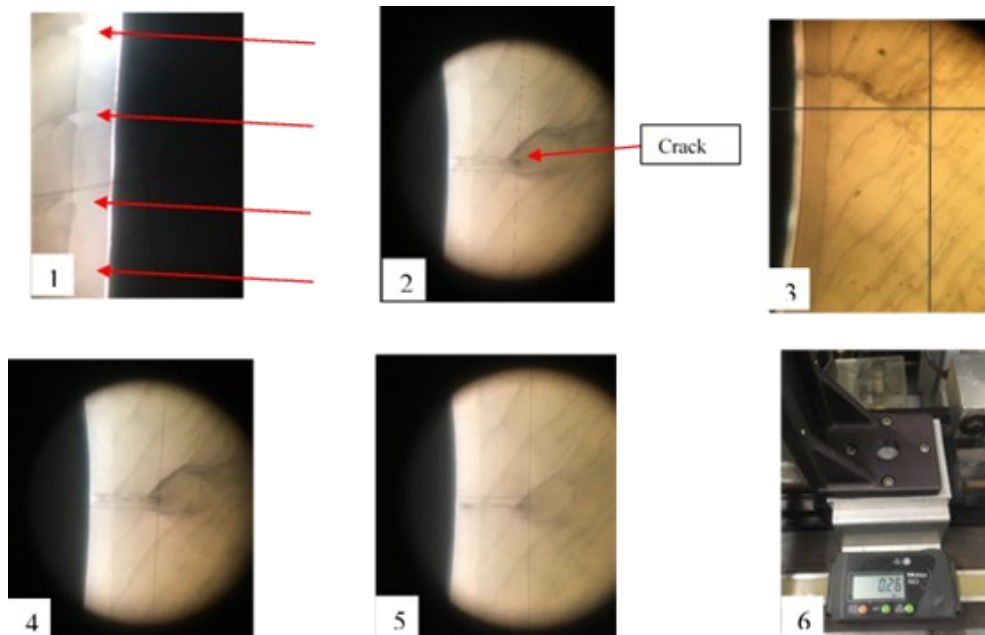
Fatigue crack characters: 1. cracks initiation 2. edge crack and a central crack formed to crack one individual crack, 3. crack propagation, 4. open cracks under tension loading, 5. crack at zero load, 6. microscope digital reading in mm.
